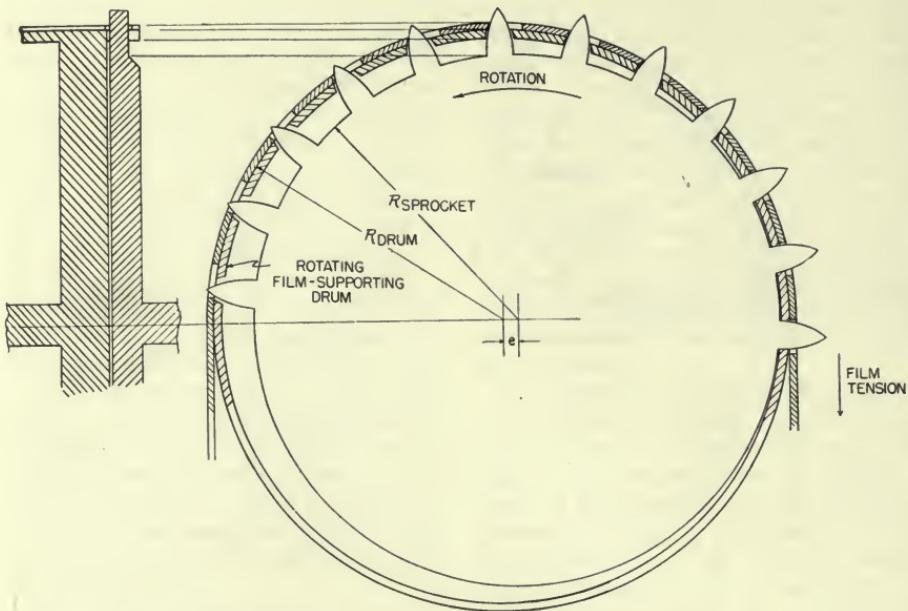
Rotating stripper, variable-pitch sprocket. Stripper is driven by gear action of sprocket teeth in slots in edge of drum.
